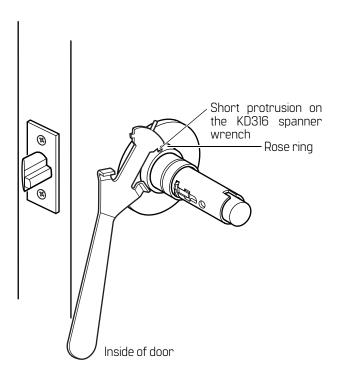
Removing the inside rose ring with the KD316 spanner wrench
